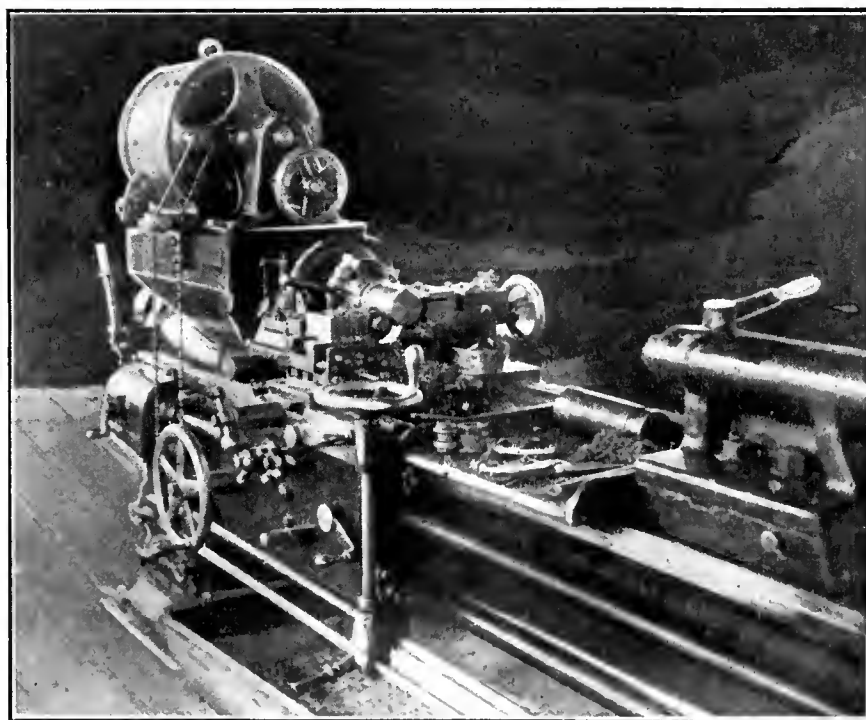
CANADA MACHINERY CORPORATION MOTOR-DRIVEN ENGINE LATHE TOOLED-UP TO TURN THE COPPER DRIVING BAND RECESS.
